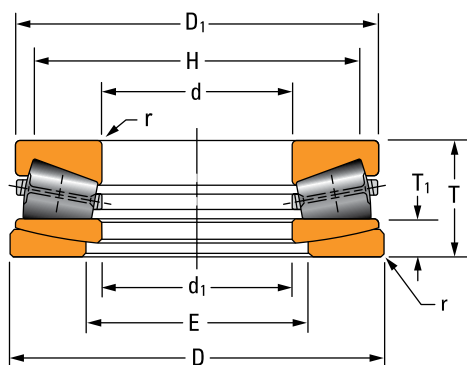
Type TTHDFLSA thrust tapered roller bearing.
